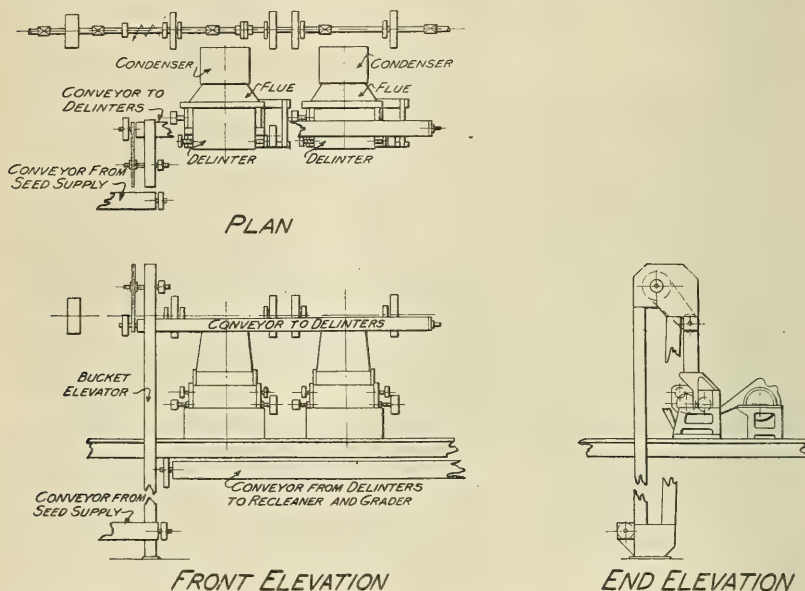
General lay-out or plan of two-unit delinting plant. Note: No attempt is made here to show the details or to suggest a fixed plan of installation. Manufacturers no doubt will be glad to cooperate with prospective buyers in working out the most economical and efficient plan of installing and operating such machinery under varied conditions and for any special requirements.
